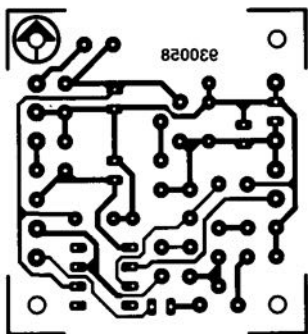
Track layout and component mounting plan of the printed circuit board designed for the receiver-to-PC interface.
